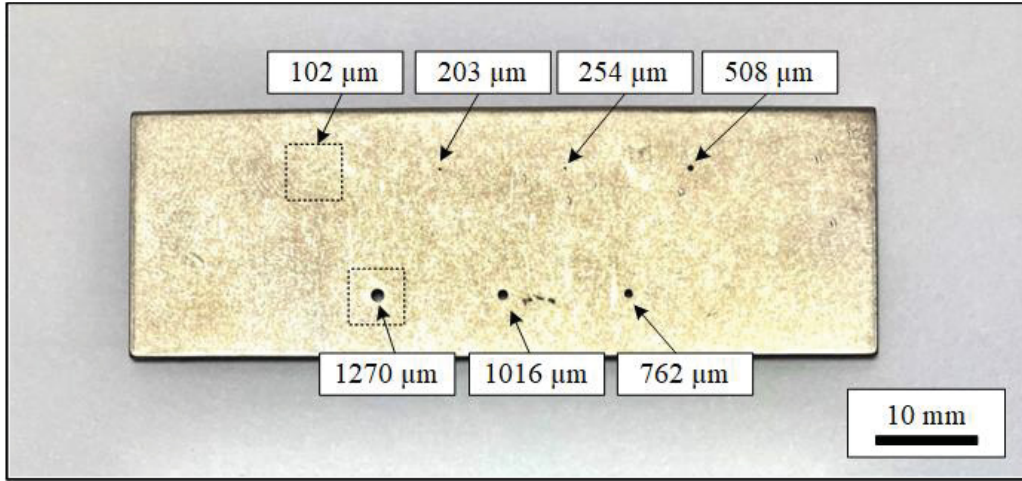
Top view of the 7 holes produced by conventional drilling
